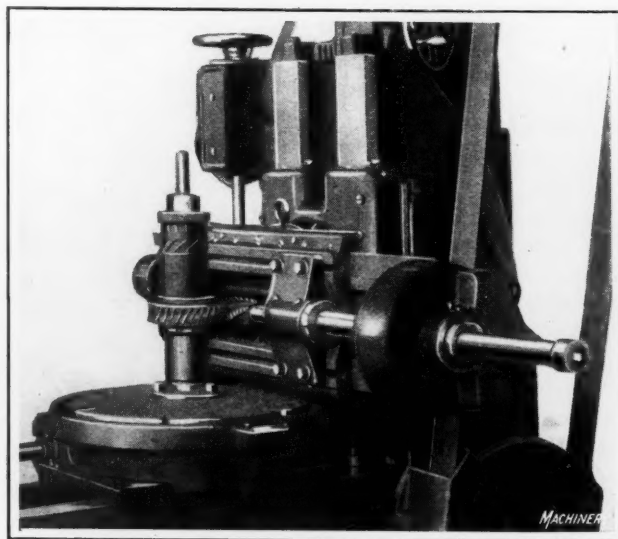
Gear-hobbing Machine with Cross-feeding Attachment for cutting Worm-gears by the Taper-hob Method
